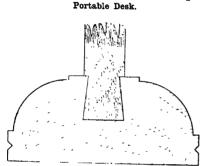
Dovetailing of Side and Bottom Stand of Portable Desk.
